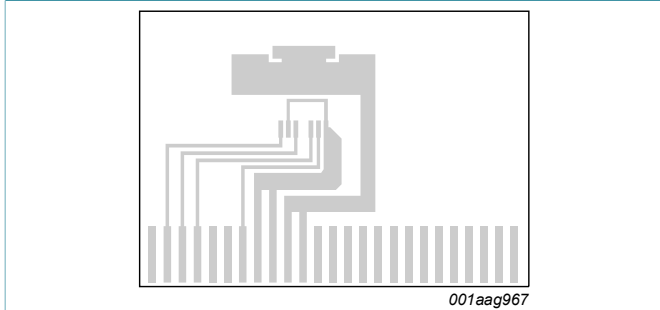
PCB used for thermal tests; heat sink area 200 mm²
